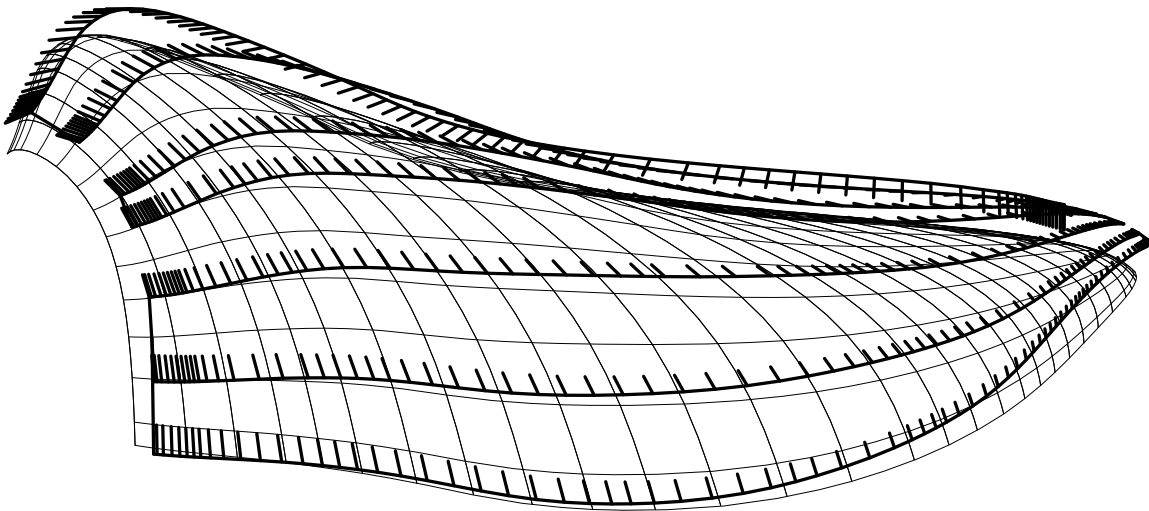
The toolpath for the top side of the blade of this marine propeller was generated using the piecewise ruled surface approximation technique (Figure 7). See Plate 2 for a picture of the machined part.
